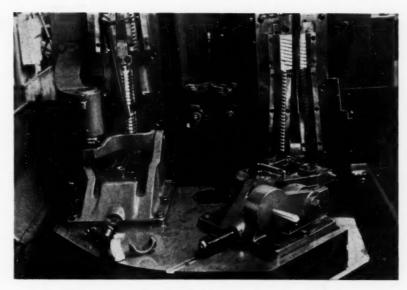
VERTICAL DUPLEX BROACHING MACHINE BROACHING THE HALF BORE AND PARTING FACE ON AN AUTOMOBILE-ENGINE CONNECTING ROD
